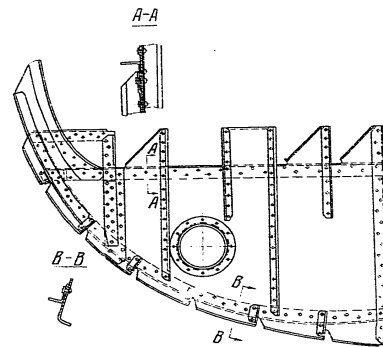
STRESS-CARRYING FLOOR STANDARD FRAME.
